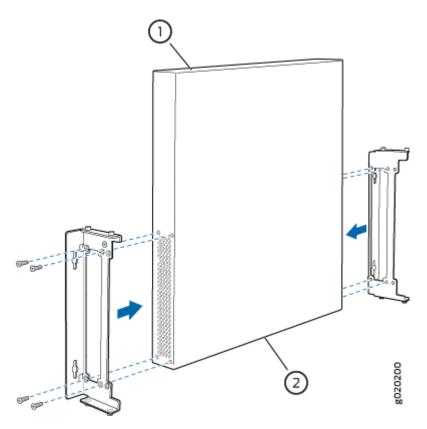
Attaching Wall-Mount Brackets to the Switch Chassis
